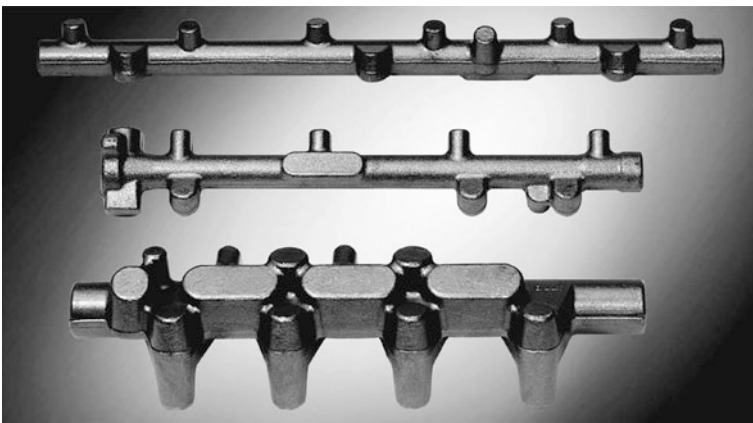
Forged blanks of distributor tubes for the common rail diesel injection system, length 300–500 mm (Source Hirschvogel Umformtechnik GmbH)
